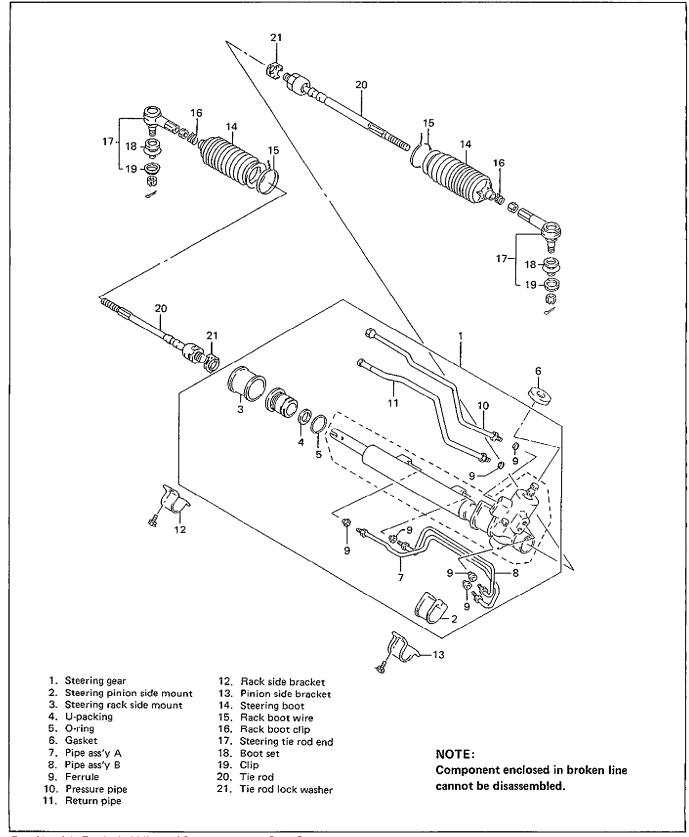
B1-34 Exploded View of Power Steering Gear Box
